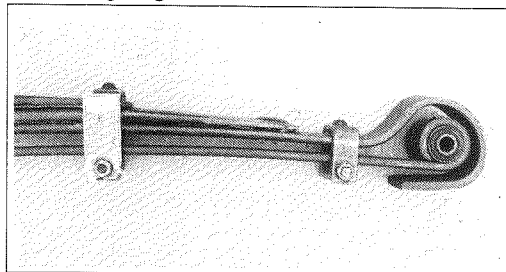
Aluminium tag on 'early genuine' springs denotes front of spring.
